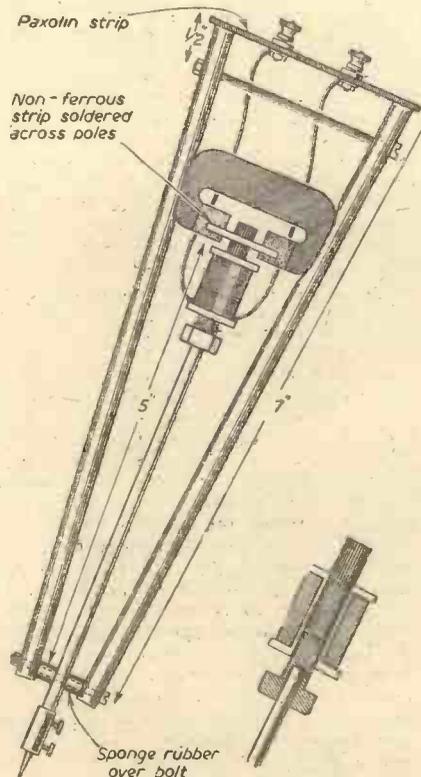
General view of the engraving tool. Fig. 2.—Section of coil showing method of mounting.
